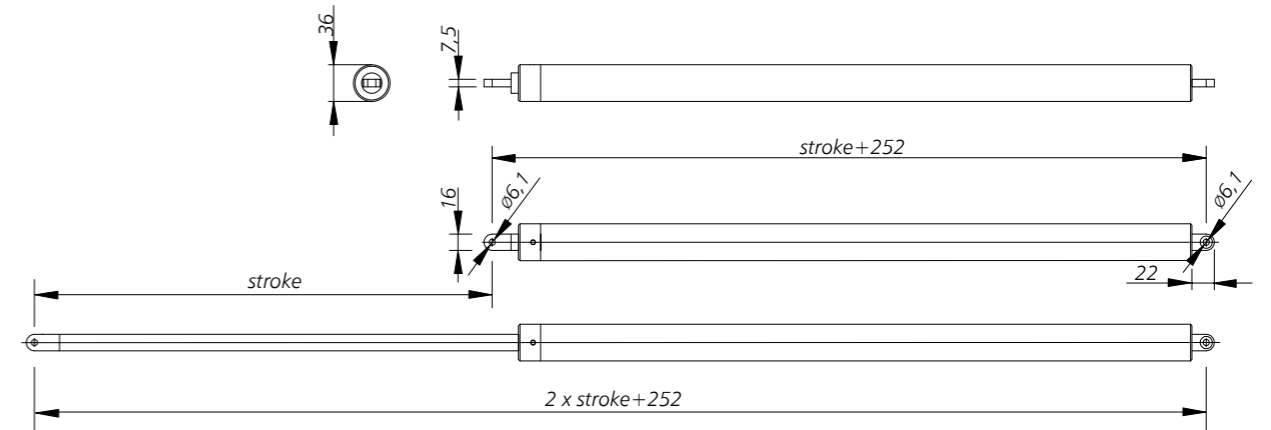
Dimensions of type S electric spindle actuator [mm]
